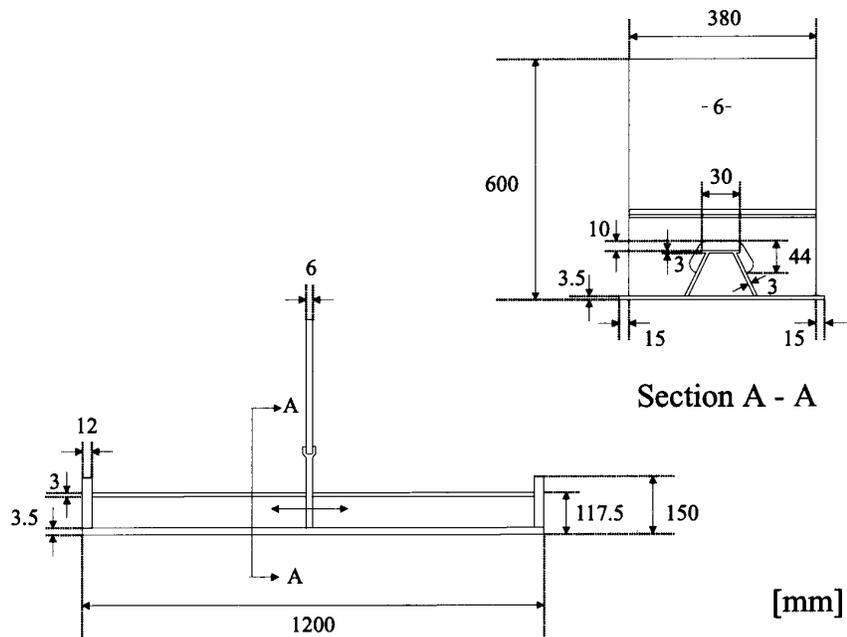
Detail 27 – Box Stiffener/Deep Frame Connection – Bending In Air.
